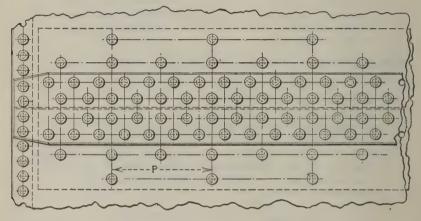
EXAMPLE OF BUTT AND DOUBLE STRAP JOINT, QUADRUPLE-RIVETED
